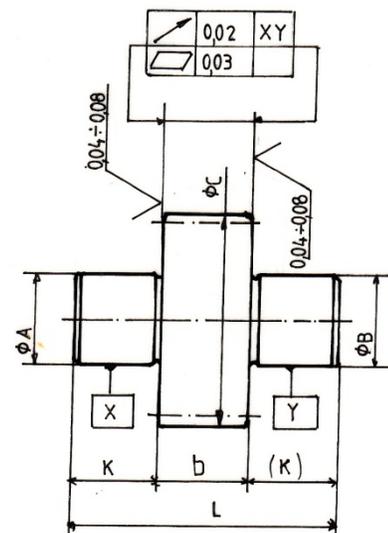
Schematic illustration of a gear pump pinion whose flat surfaces are machining by superfinishing.
